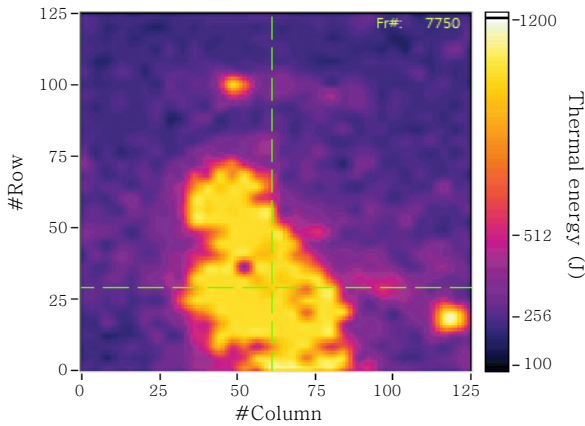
Photos of measurement on the weld zone using a thermal high-speed camera
